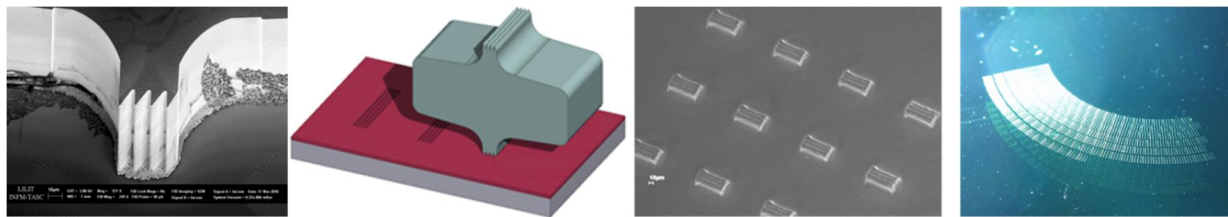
A single electroplated saw-tooth stamp made by X-ray lithography is used to make a larger stamp by Step&Stamp nanoimprinting. The working stamp can then be used to create rather complicated surfaces. These can be transferred to the Roll-to-Roll process for high throughput manufacturing.
